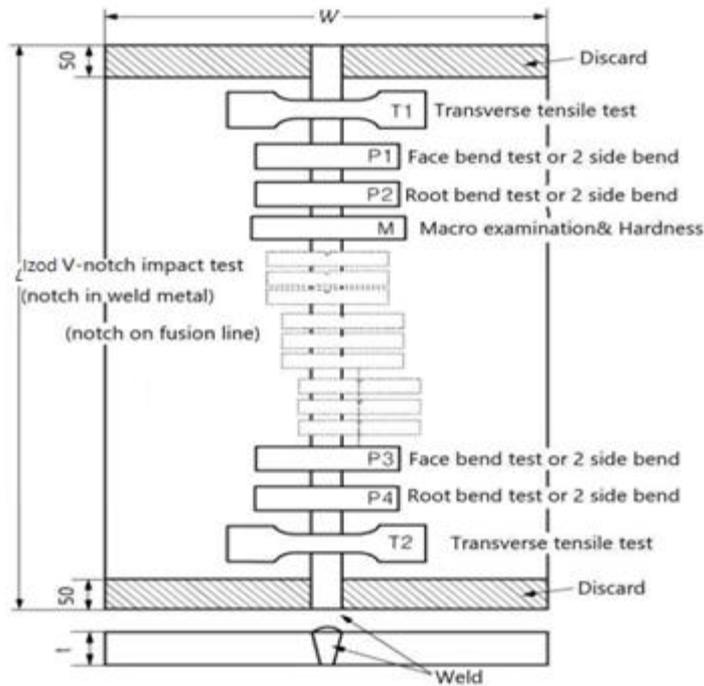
Welding procedure test assembly(Unit : mm)
